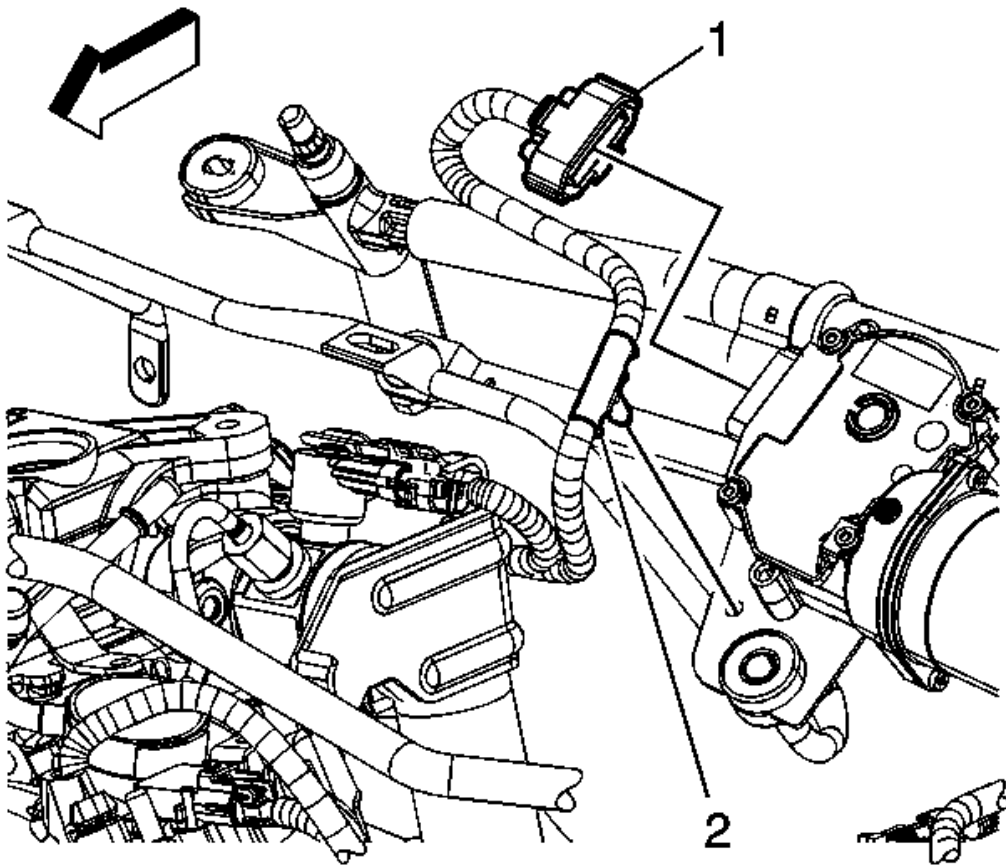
Locating Windshield Wiper Motor Electrical Connector & Harness Clip
